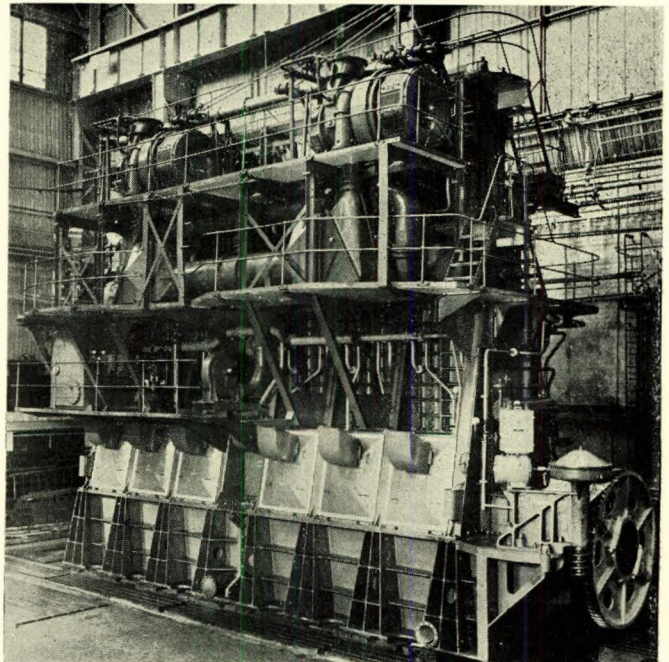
Six-cylinder turbocharged engine 620 mm. bore, 1,870 mm. stroke
